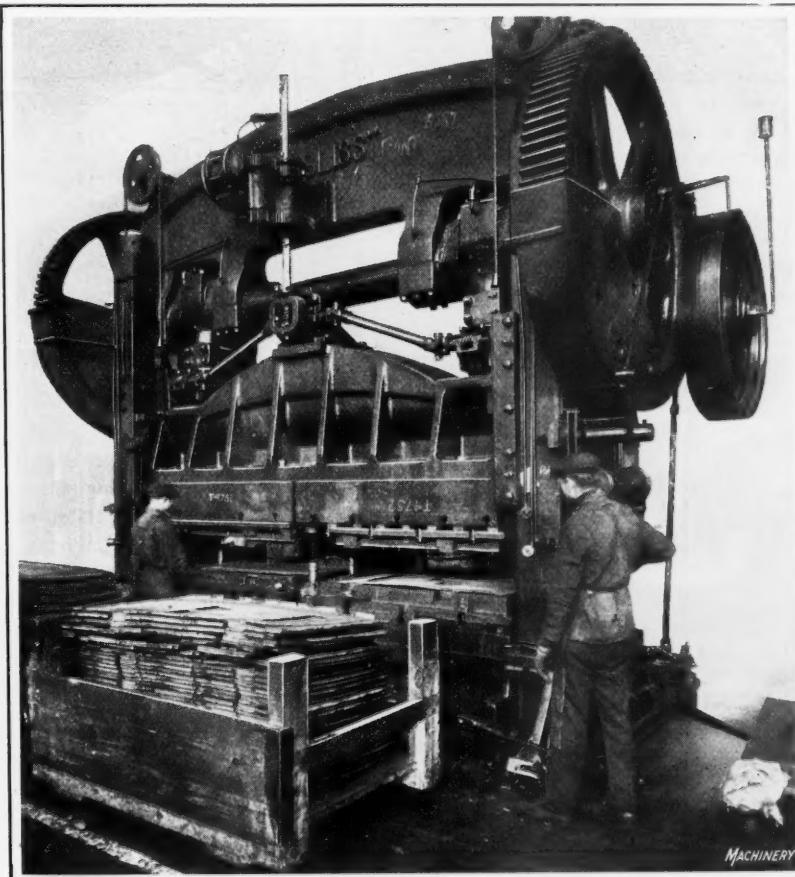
Large Single-action Double-crank Press used for blanking and flanging a Part at One Stroke
